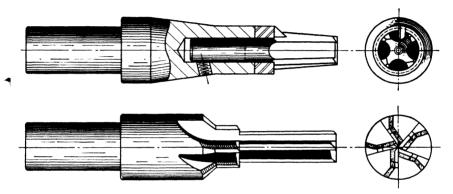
Combination reamers. The tool shown above is used to ream, counterbore, and chamfer; while that below to taper, ream, and chamfer.
